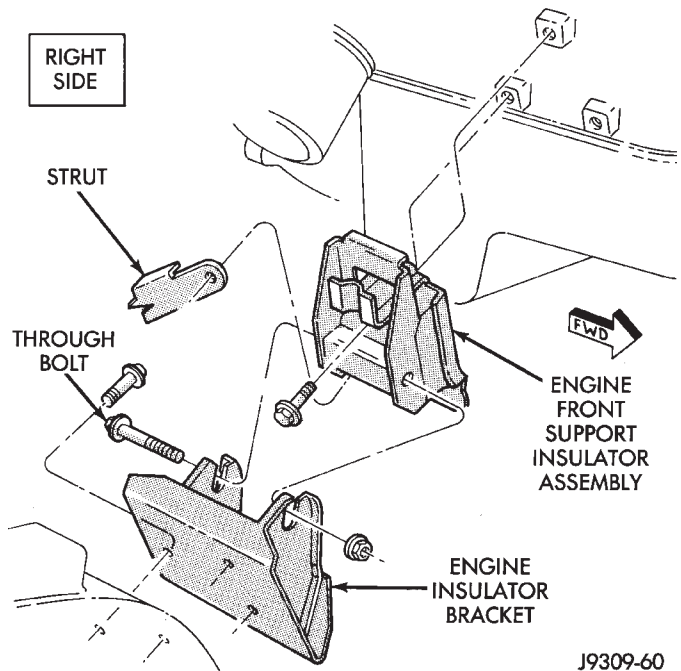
Engine Right Front Insulator Mount—2WD Vehicles
